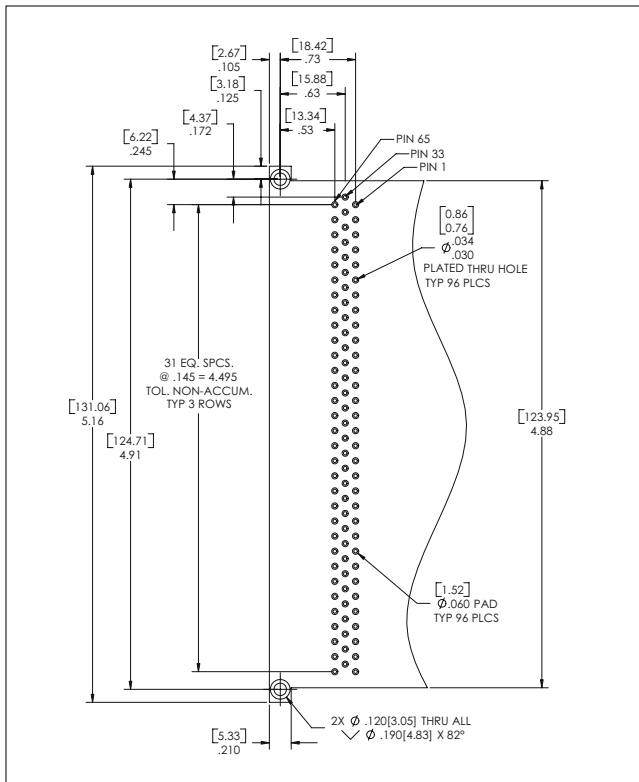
recommended board layout. Solder side shown.
